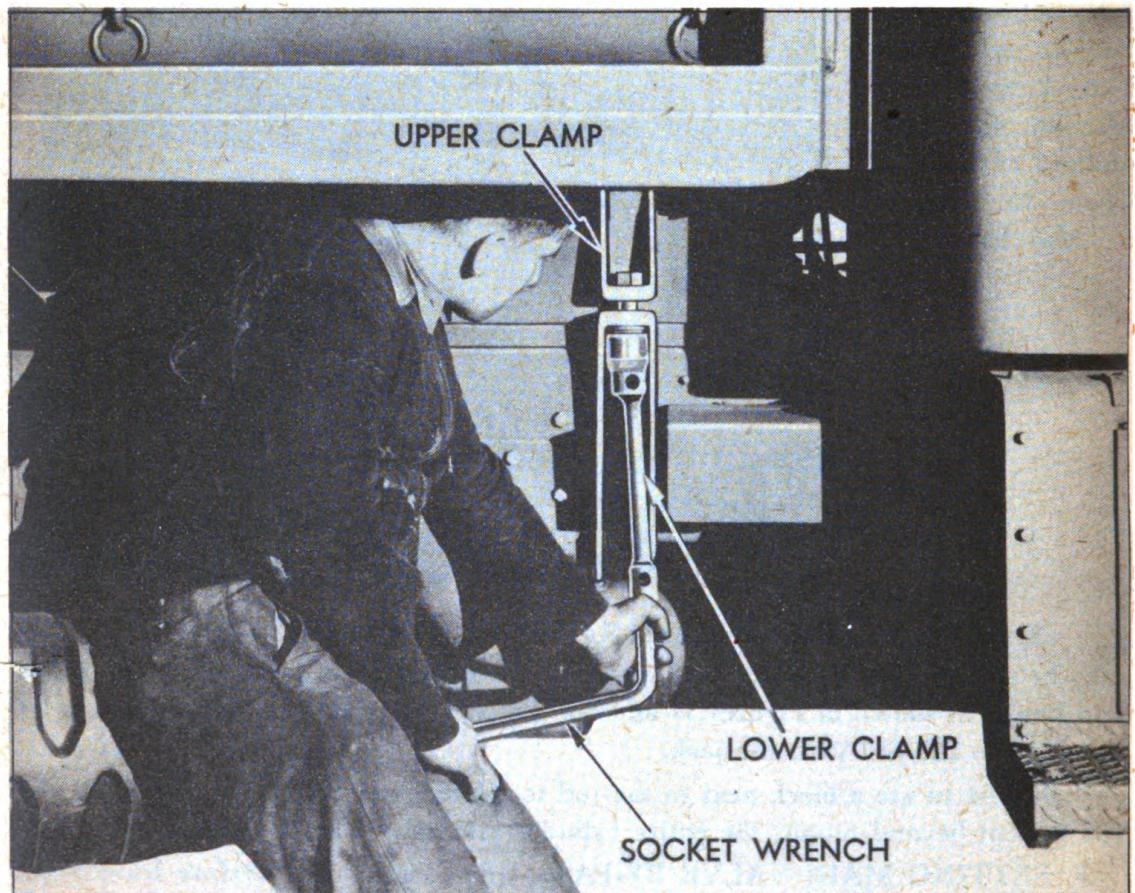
Tightening A Hold-Down Clamp Securing Body to Truck
